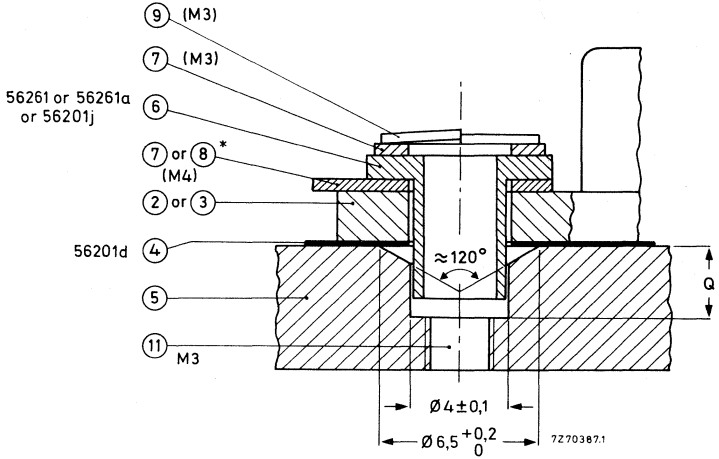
Assembly (partial) for Fig. 10 - tapped holes.
